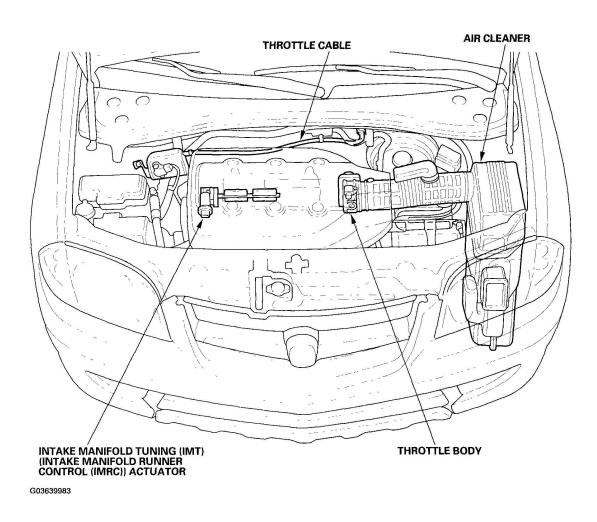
Identifying Intake Air System Components Courtesy of AMERICAN HONDA MOTOR CO., INC.
